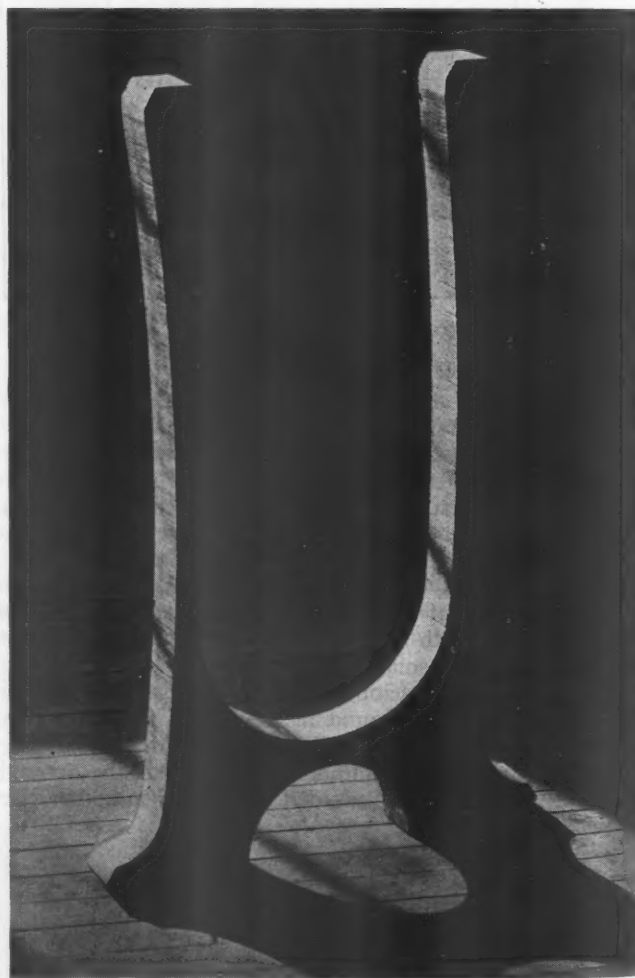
A main-frame member for a welded-steel crankcase
